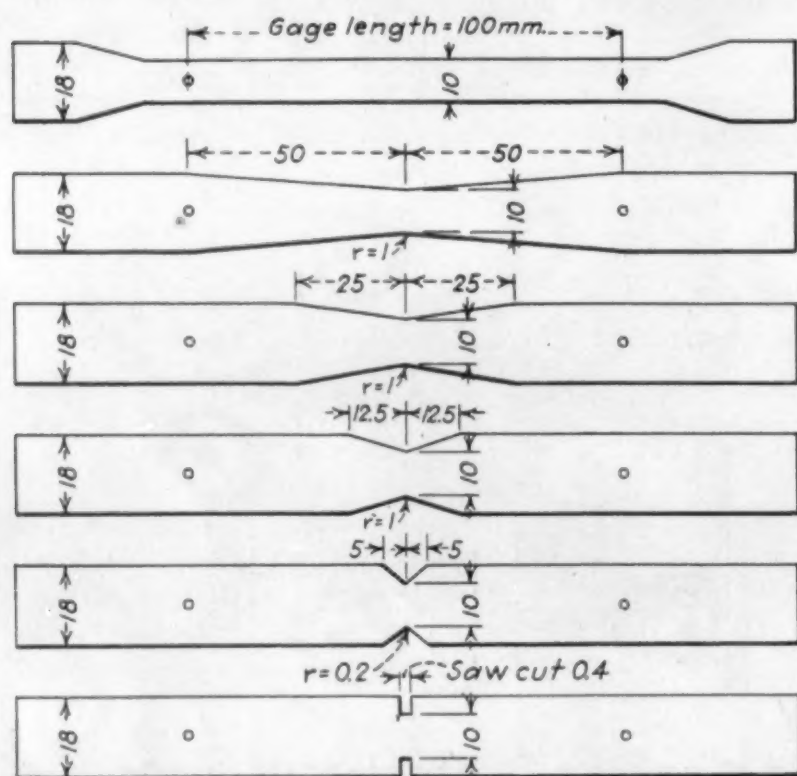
Notched Cylindrical Tensile Test Bars—in Section. (Dimensions are in millimeters). Ludwik and Scheu.
